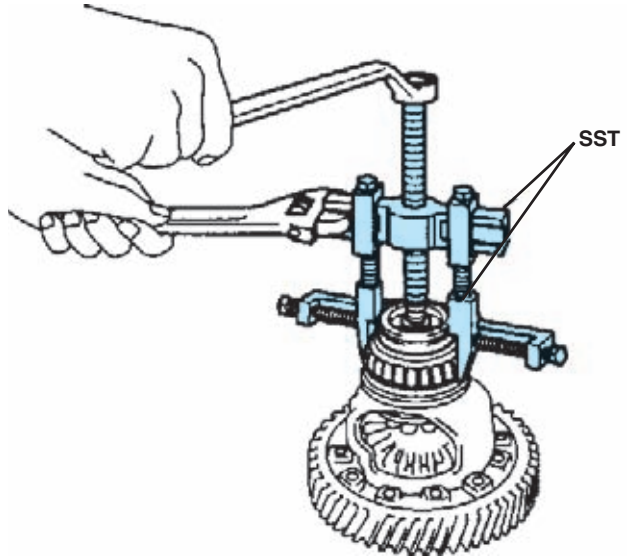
A faulty differential case bearing can be removed using a two-jaw bearing puller with an attachment for the puller to push against. (Courtesy of Toyota Motor Sales USA, Inc.)
